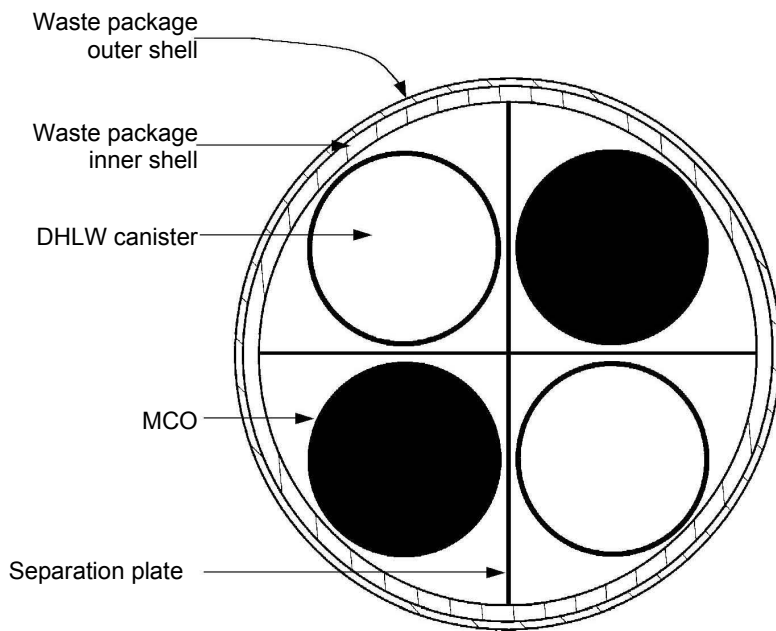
Cross-Section View of the 2-MCO/2-DHLW Waste Package in an As-Loaded Condition
